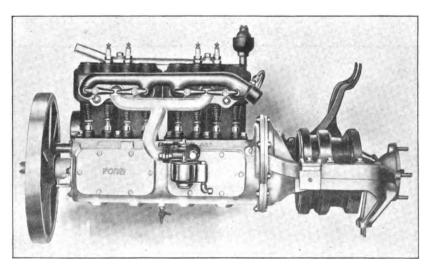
A NEAR VIEW OF THE FORD MOTOR USED IN THE MODEL S
